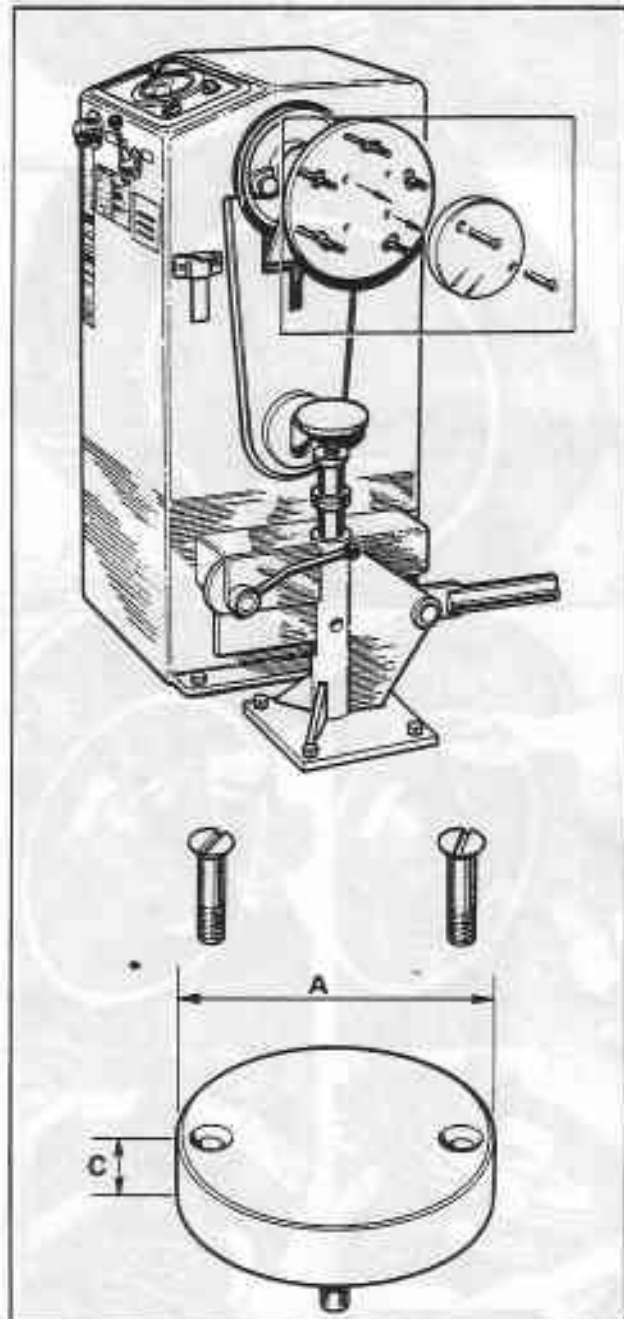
Vertical type of balancing machine with adapter for spigotted wheels
